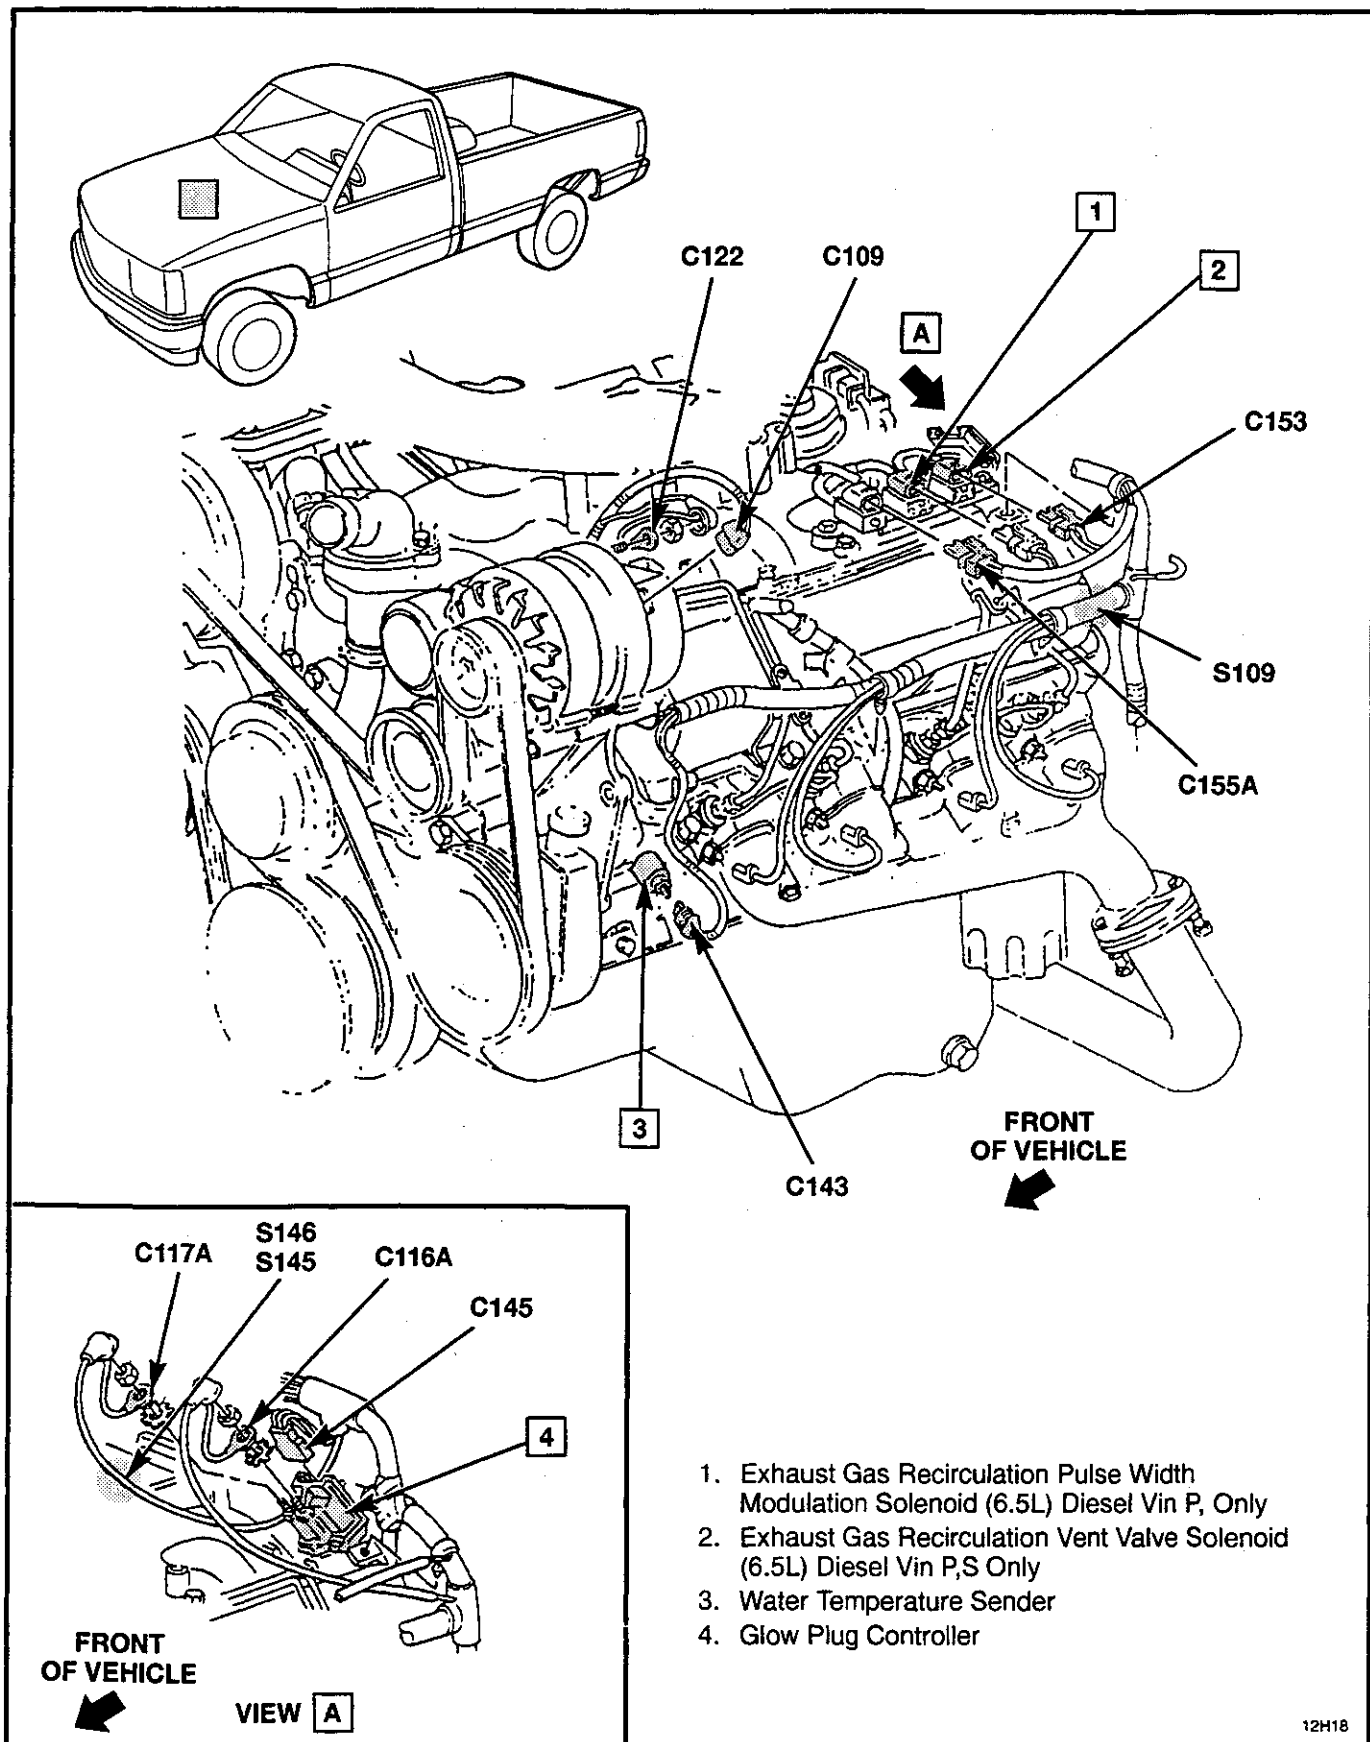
6.5L Diesel Engine Wiring, LH Side
